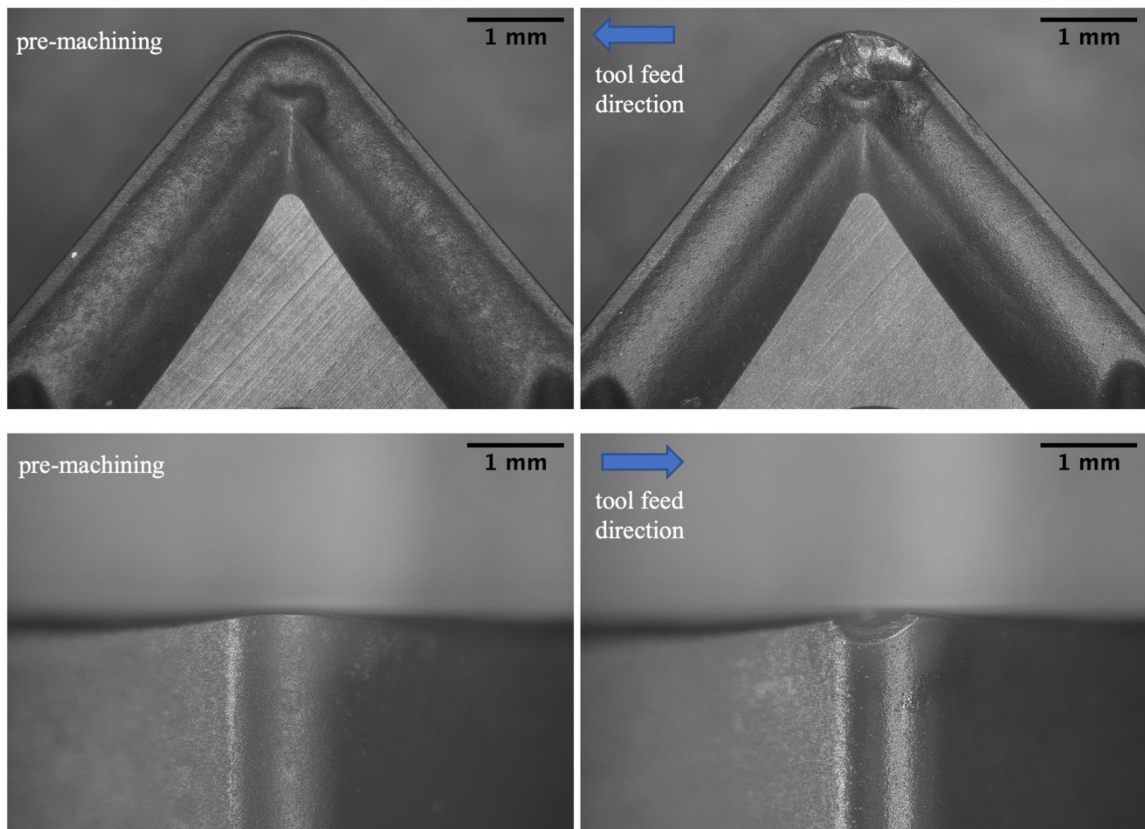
Insert 3D images of the rake face and nose before dry machining (top-left and bottom-left respectively); images of rake face and nose after catastrophic failure (top-right and bottom-right respectively).
